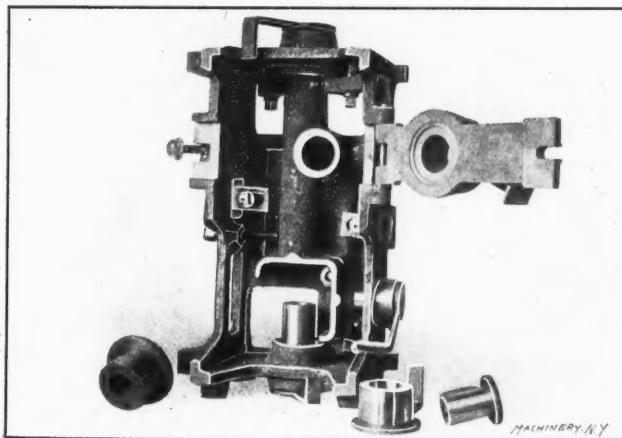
Closed Drill Jig, showing Leaf Opened.
